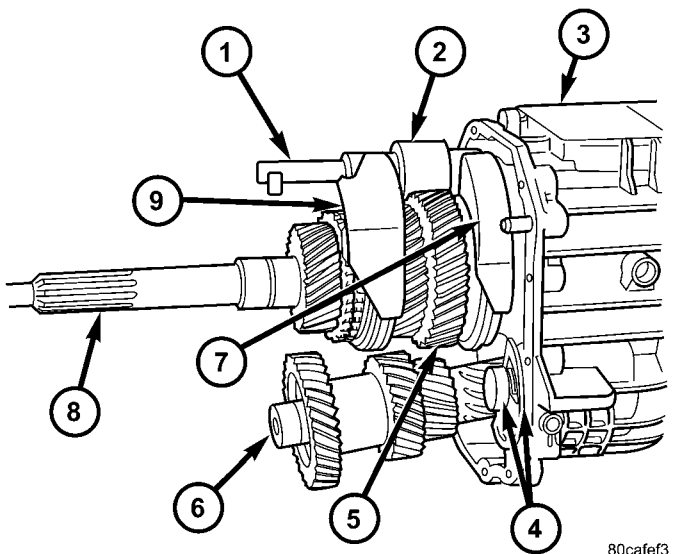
GEARTRAIN AND SHIFT COMPONENTS
